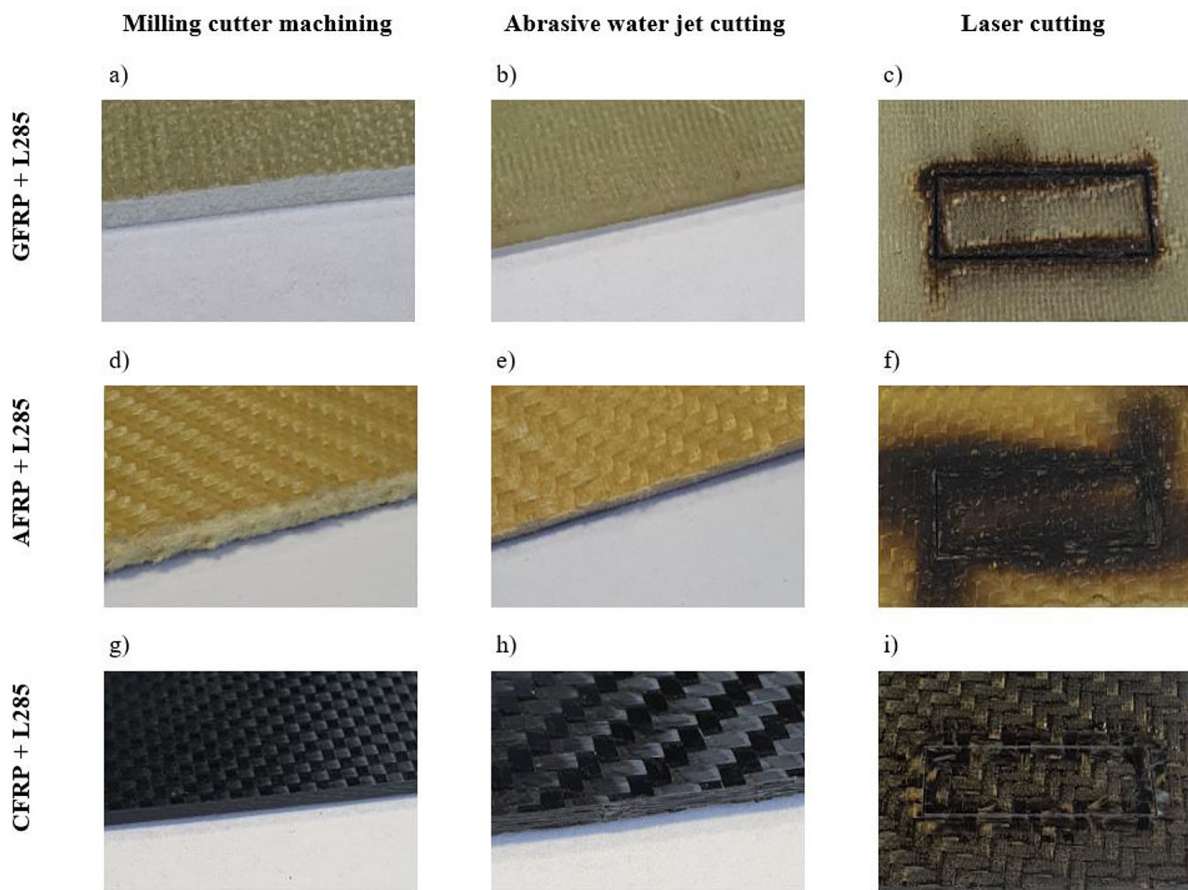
Matrix of test results for composite plate cutting using milling cutter machining, abrasive water jet cutting and laser cutting
